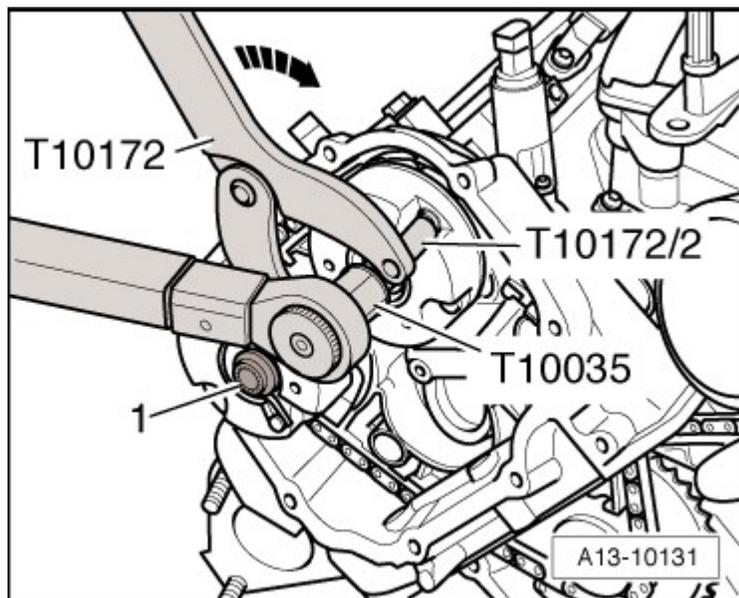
Identifying Camshaft Adjuster Bolts
